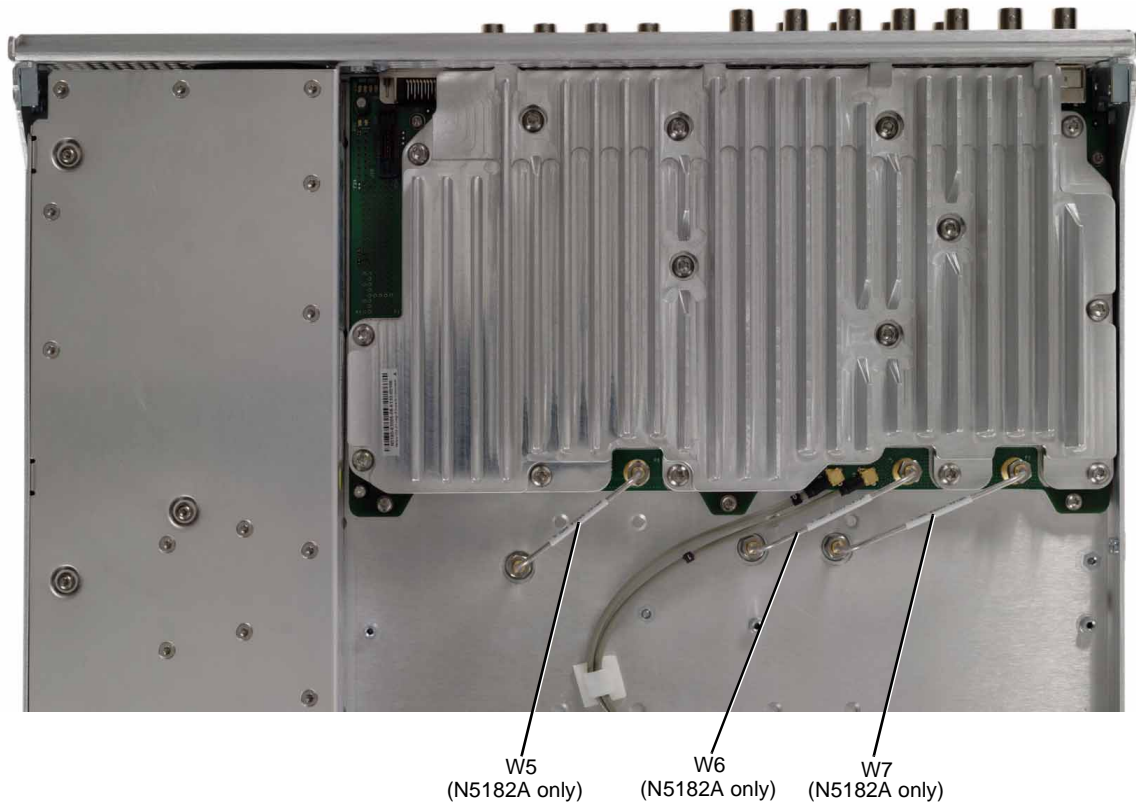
A3 RF Assembly - 1EM (2 of 3)
